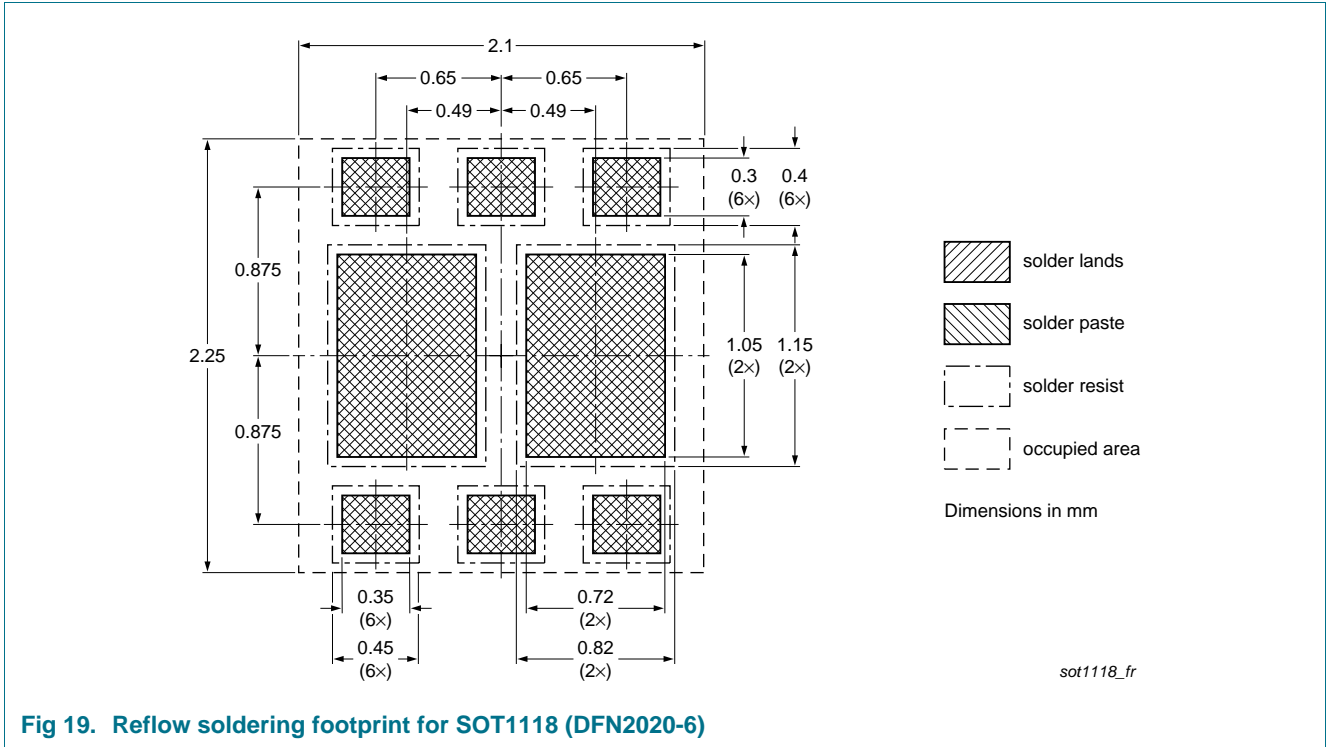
Reflow soldering footprint for SOT1118 (DFN2020-6)
